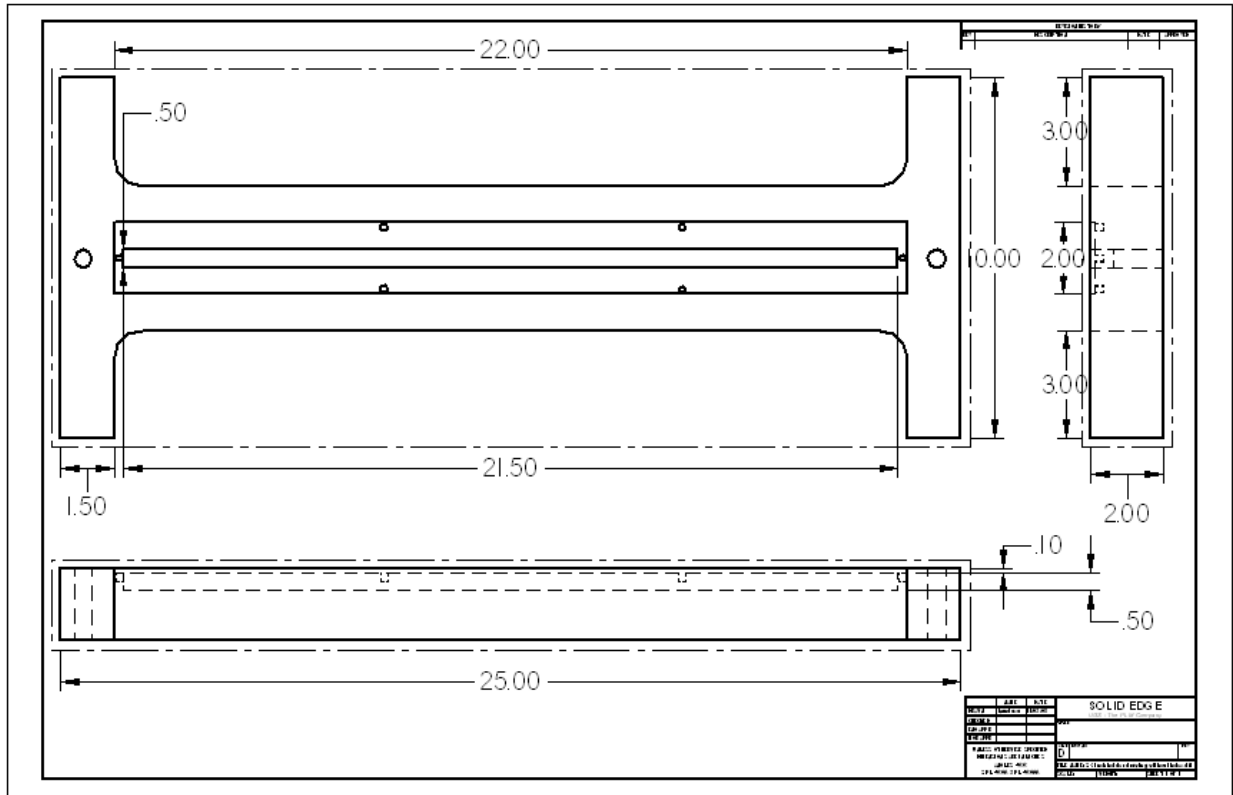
Drawing of the holder with dimensions in inches without the accommodations for steel wells; all dimensions are in inches.
